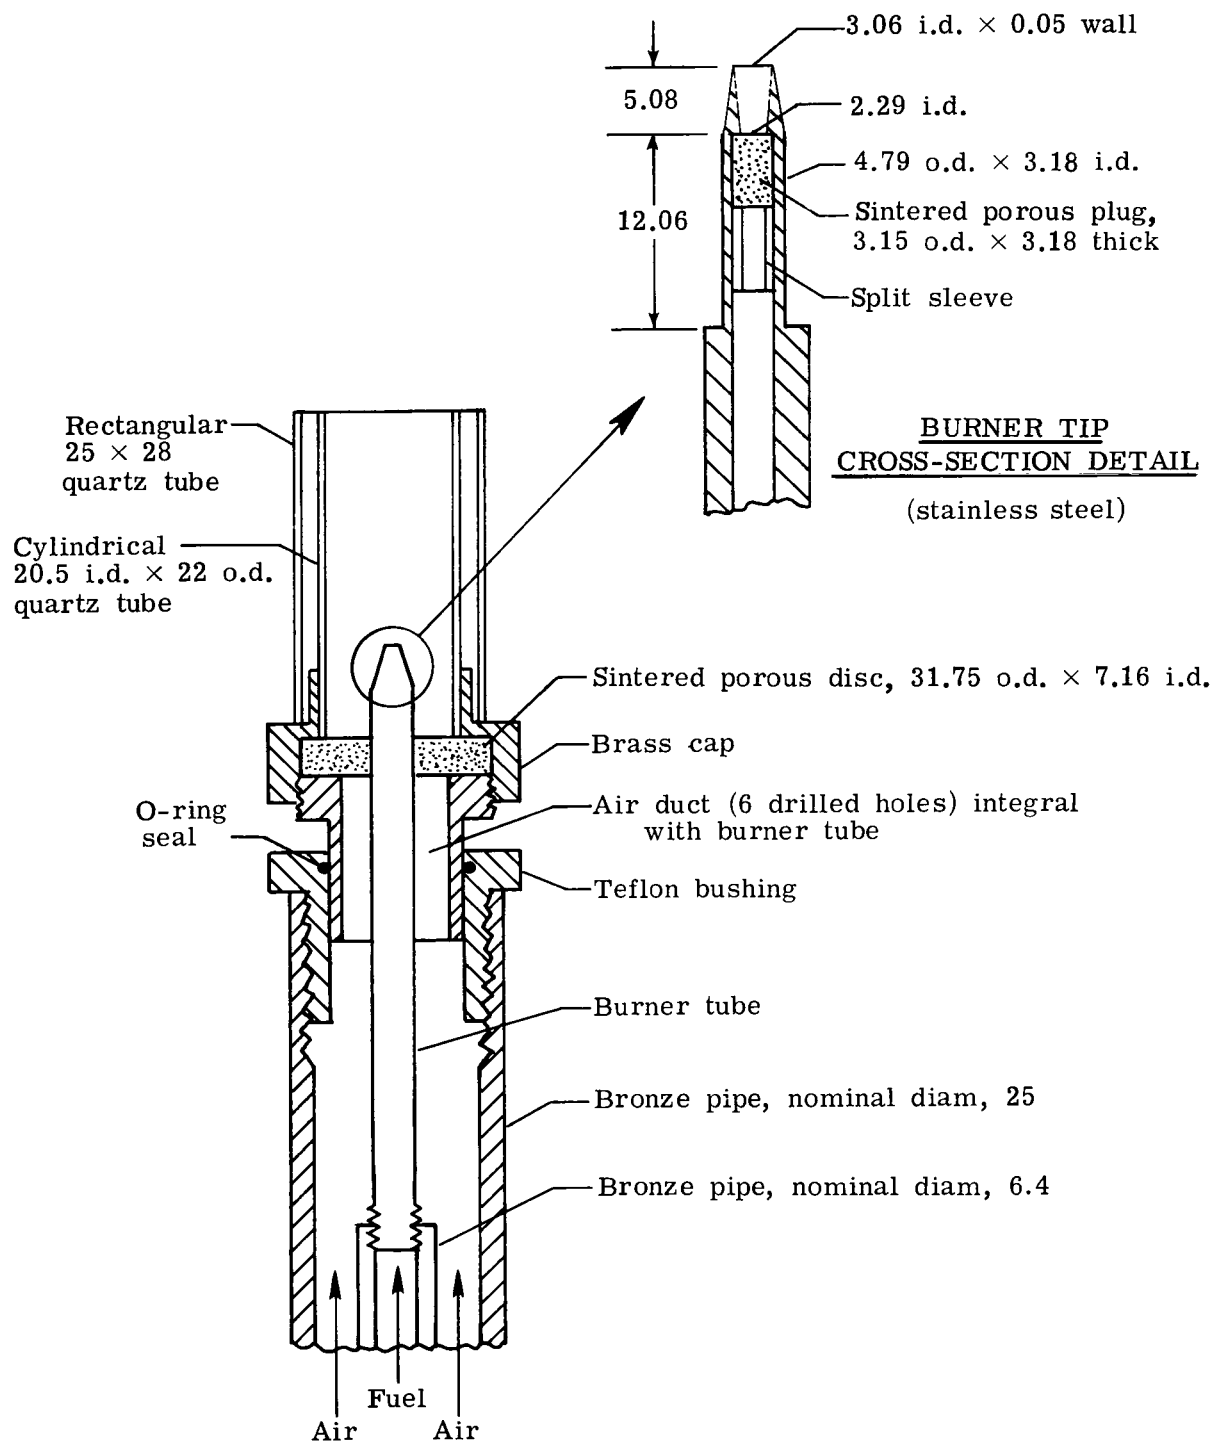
Burner assembly and detail. All dimensions are in millimeters.
